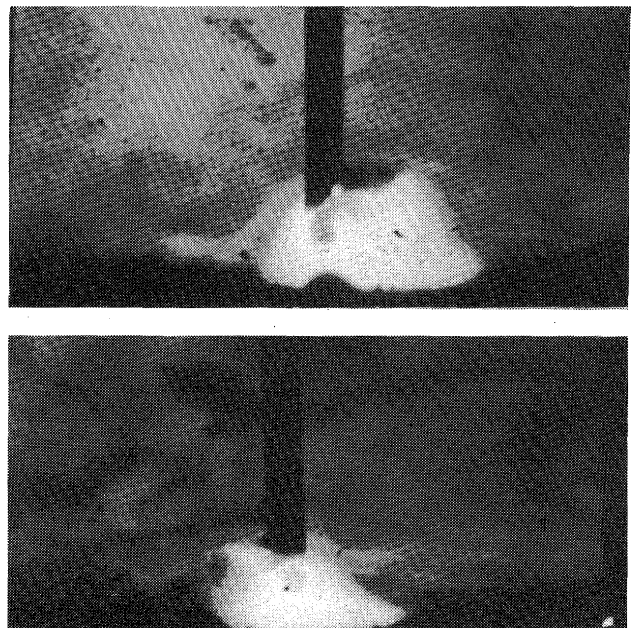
Typical photographs showing the separation of metal portion from cored flux in FCA welding under the condition of DCEN of wire A.
